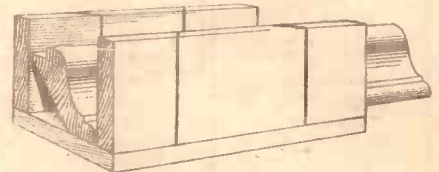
This rough mitre box is made to cut the angles of the sloping moulding (No. 44).
